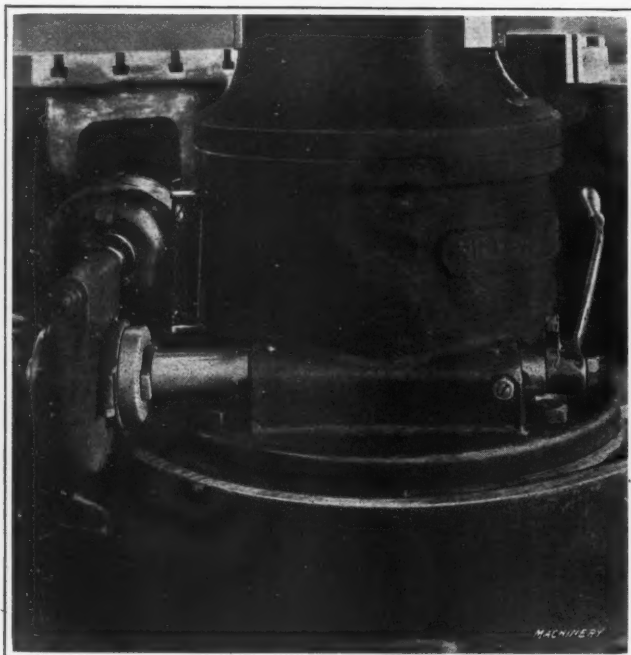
Column-clamping Mechanism operated either electrically from the Head or by a Hand-lever shown in this Illustration
